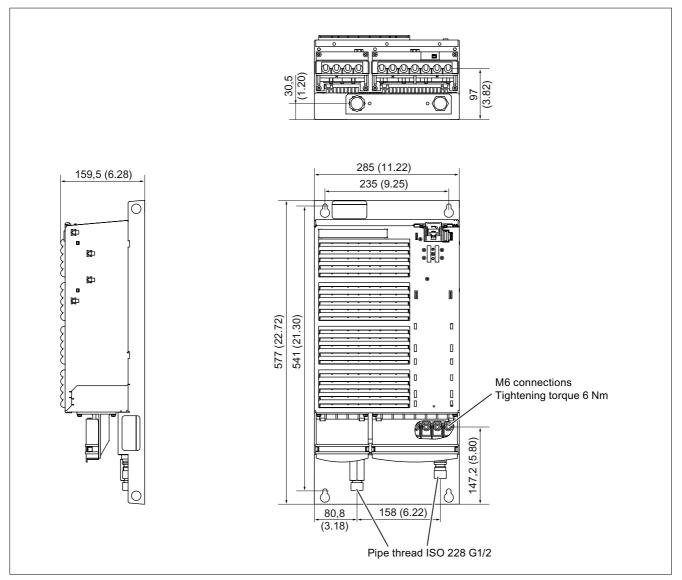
Dimension drawing of Liquid Cooled Power Module PM340, frame size FSE, all dimensions in mm and (inches)
